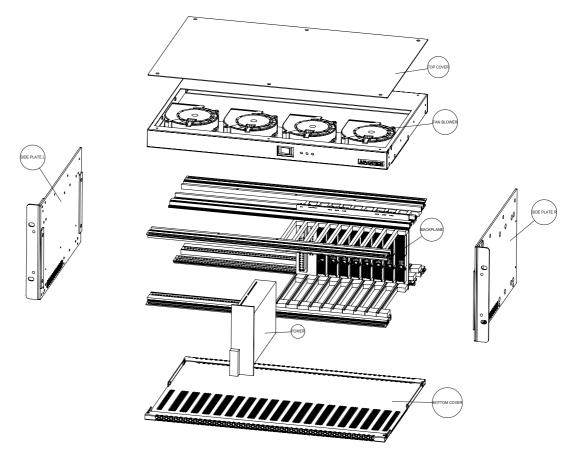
MIC-3022 with COMPACTPCI Power Supply Explosion View
